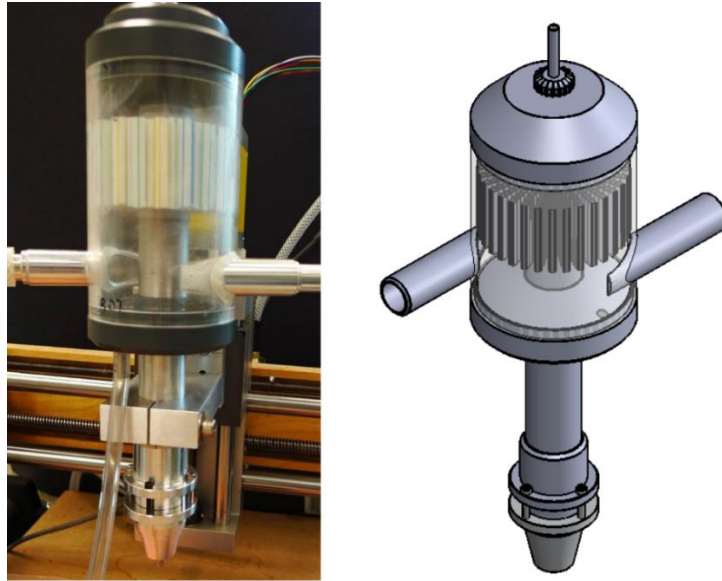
3D model of the nozzle (right) and a nozzle mounted on a CNC router (left).
